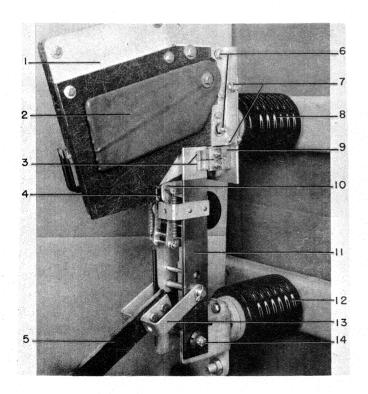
Side View Auto-Blast Switch R/O Assembly
